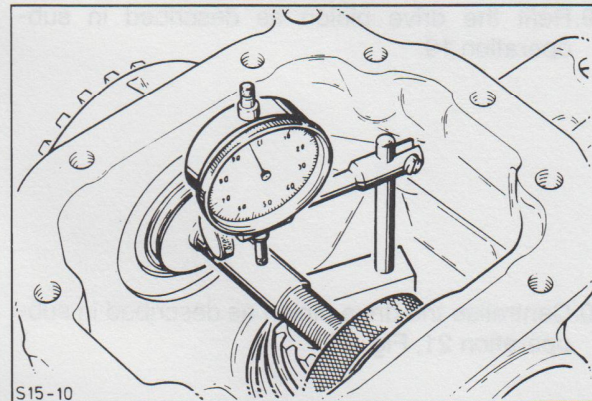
Dial test indicator reading to the left of the '0'. Shim under pinion is too thick.
